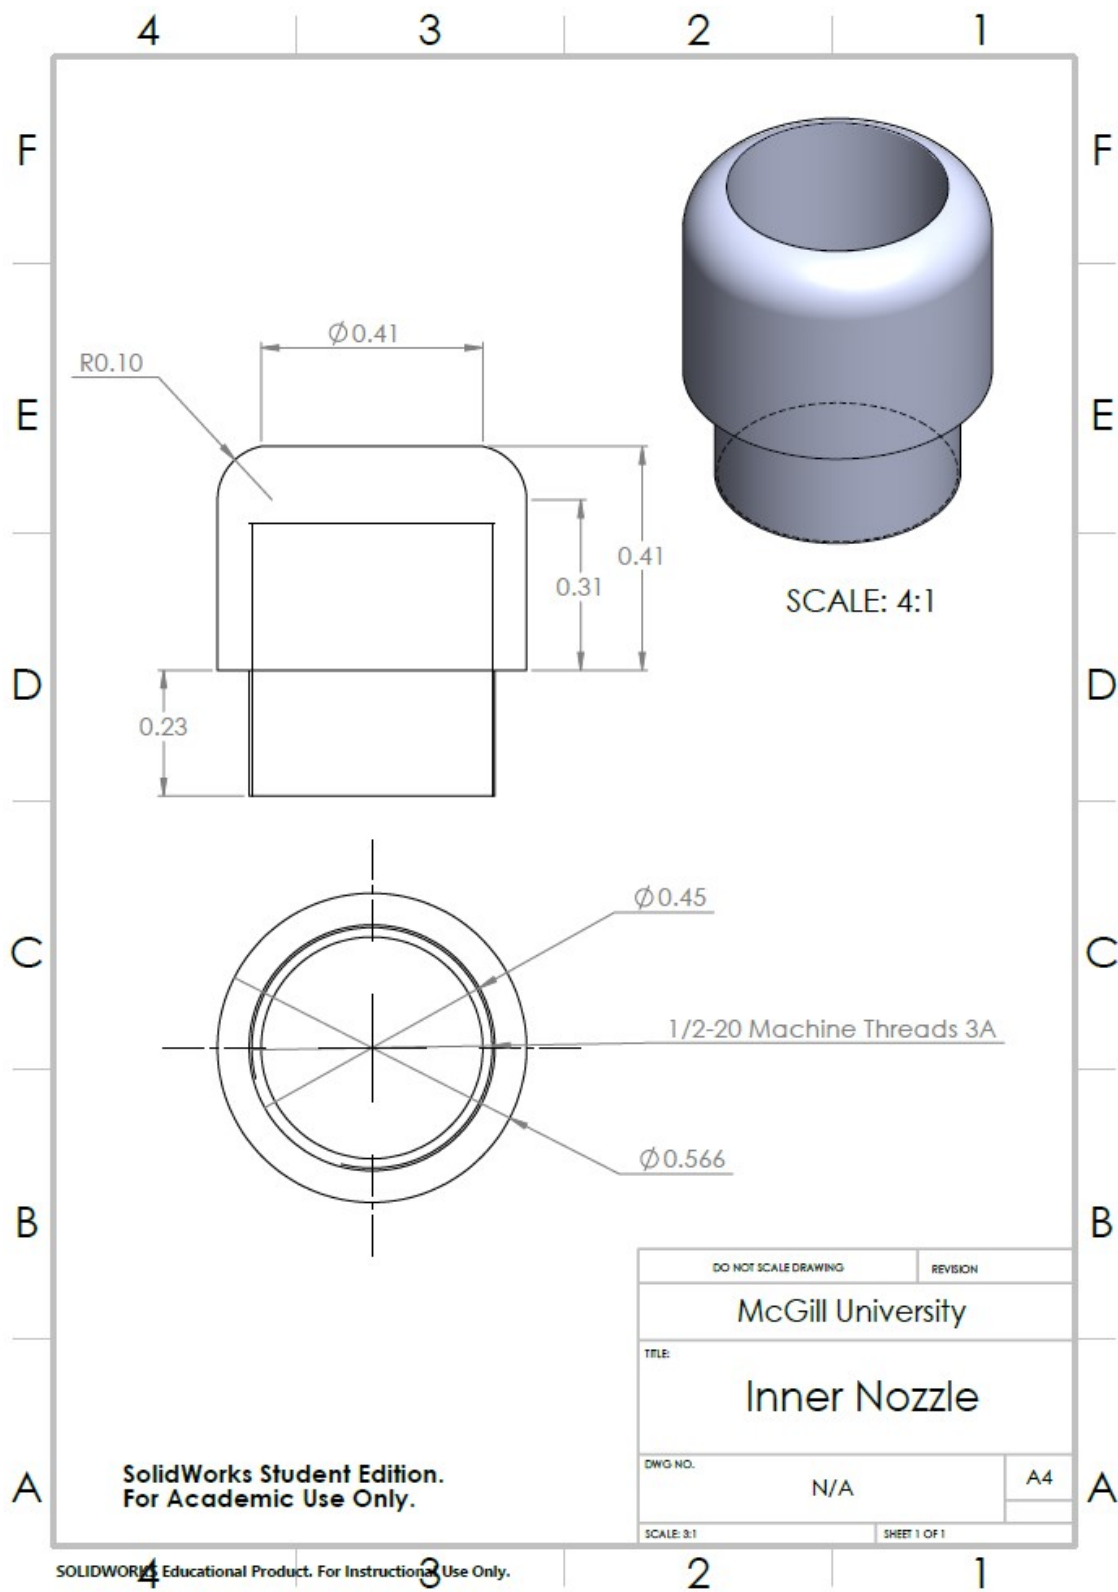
Design drawing of top modular piece to inner plenum. Piece fastens on top of low-swirl injector.
